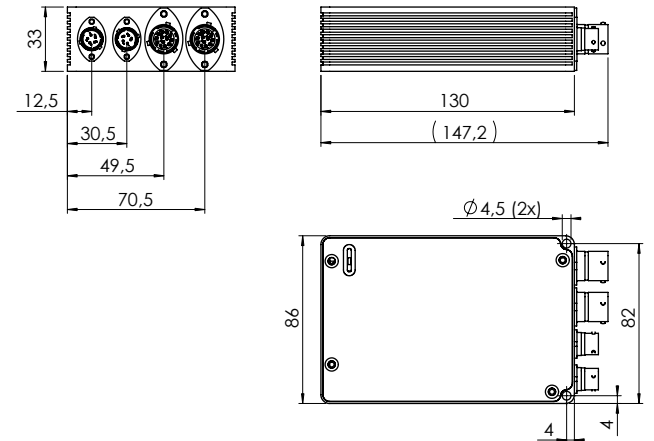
Dimensions Correvit® SFII/SFII-P electronics
